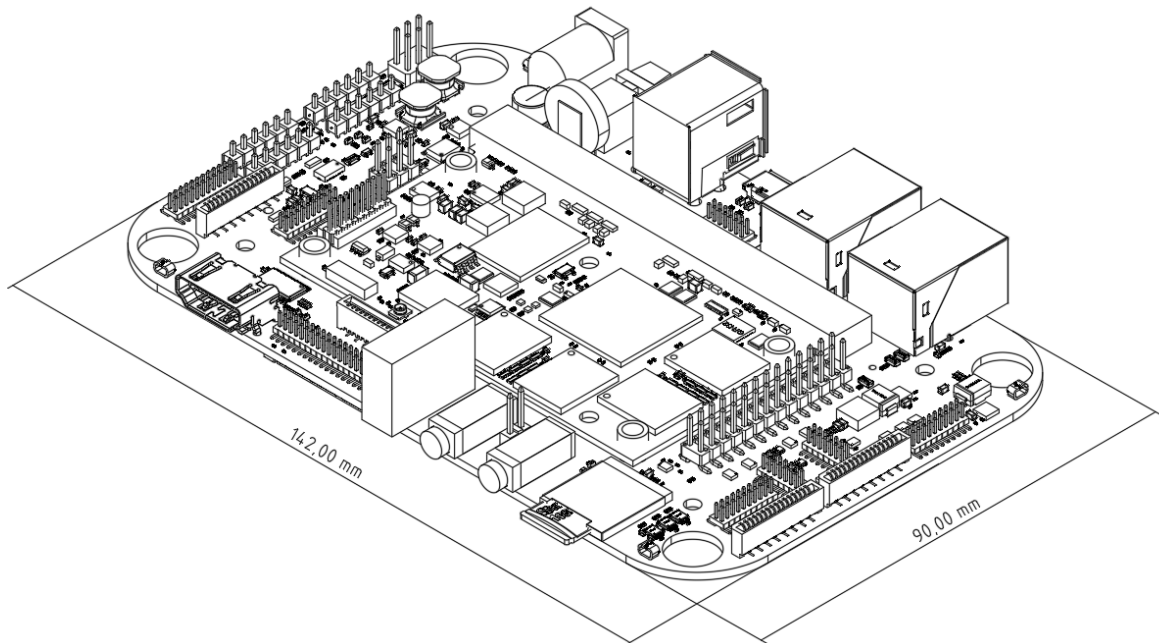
BASE SMARC™ EXPANSION Outline dimensions
